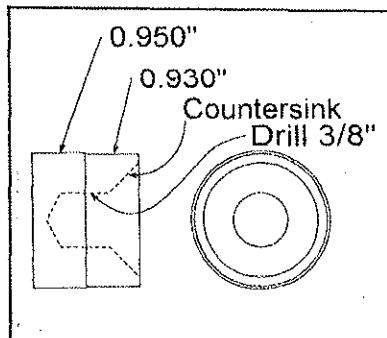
A coring-rod plug for 29mm casting tubes 0.93" id, 0.95" od.
